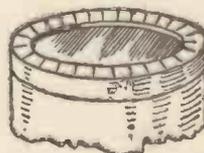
The Flat Ring of Card placed on one end of the Cylinder.
